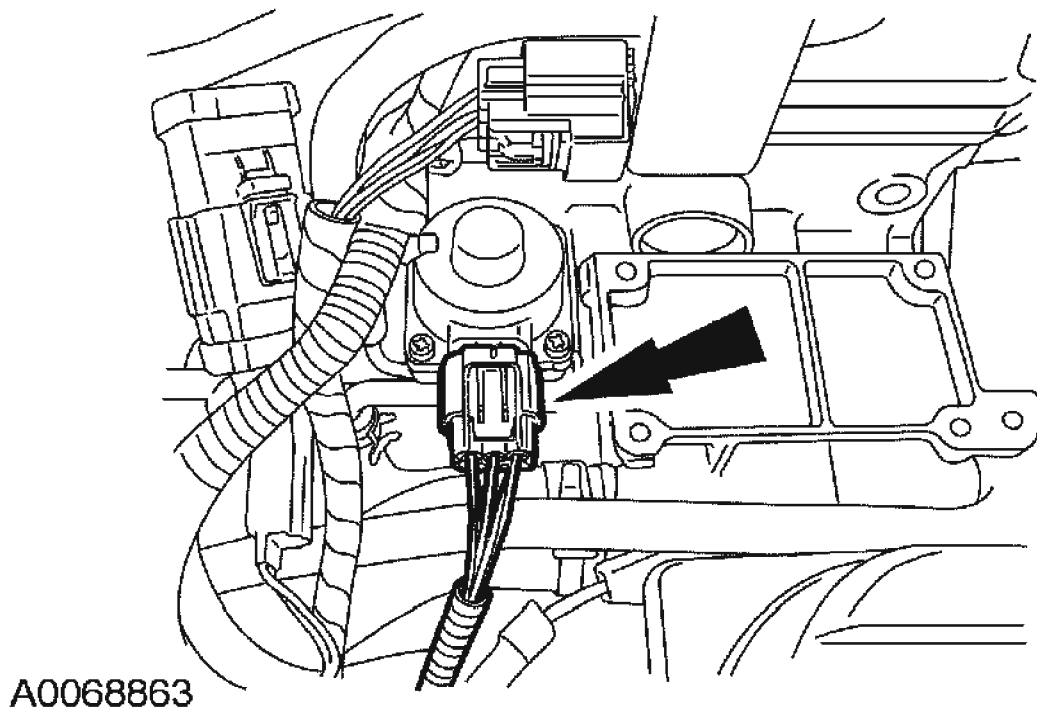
Disconnecting Exhaust Gas Recirculation Valve Electrical Connector
